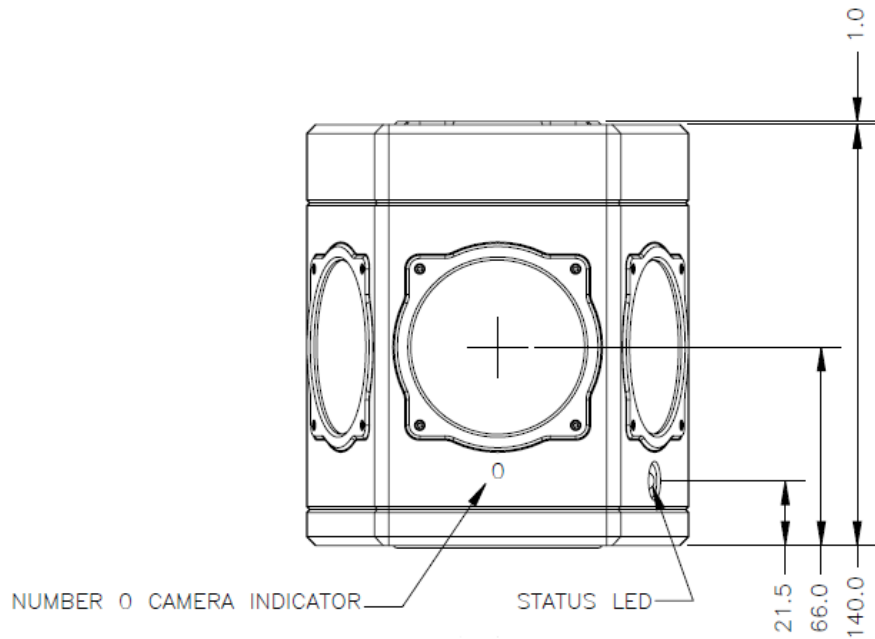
Camera dimensional drawing, side view (measurements in mm)
